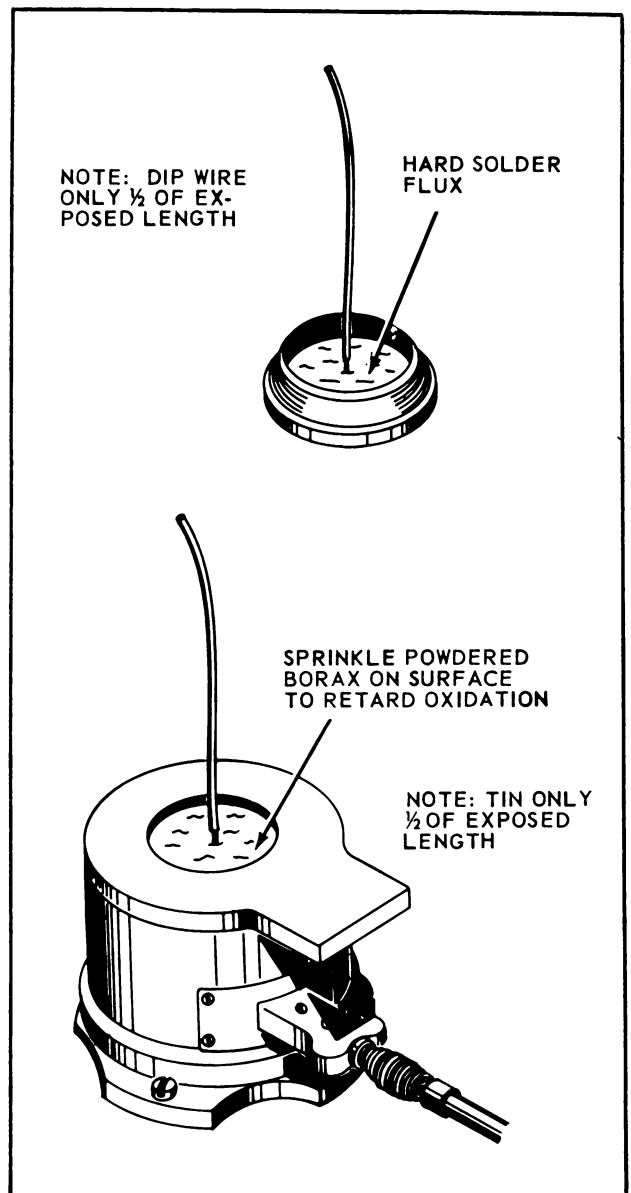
Dip Tinning Thermocouple Wire in Silver Solder
